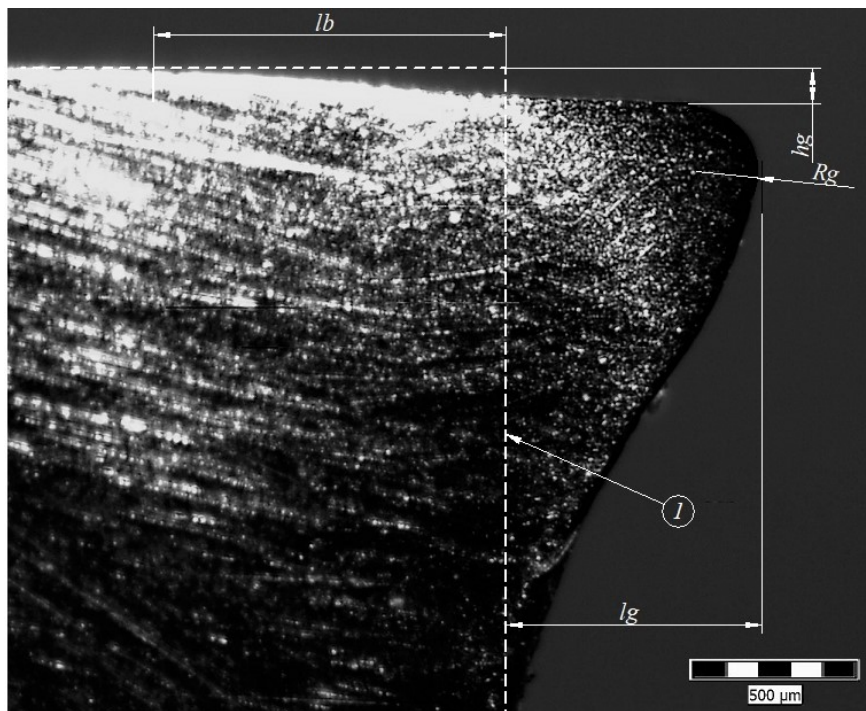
Photograph of material displacement on the face surface of the shaft as the effect of burnishing peripheral surface shaft: 1- the outline of shaft before material displacement, lg - maximum distance of moved material, hg - concavities of the peripheral surface shaft on the displacement material, lb - distance of begin concaving.
